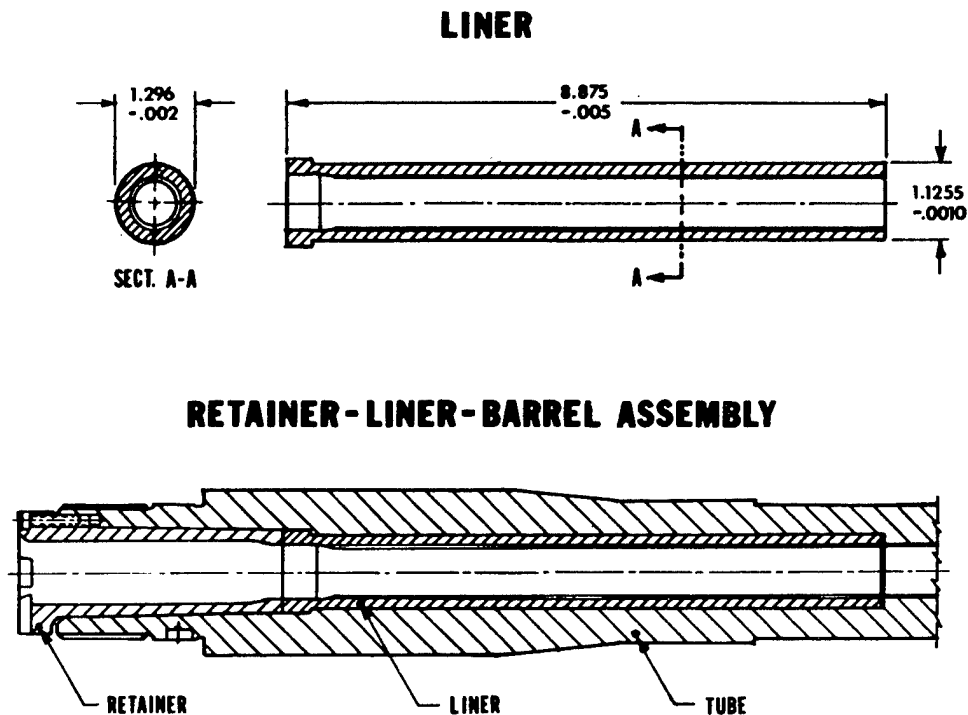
Sketch of the 20 mm liner and the retainer-liner-barrel assembly.
